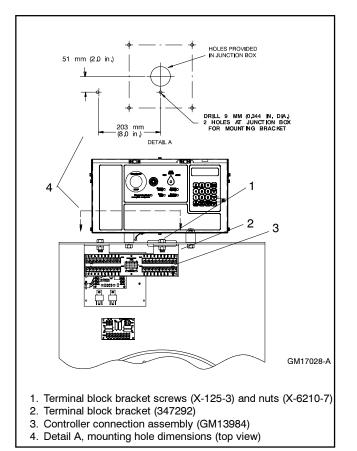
Terminal Block Bracket and Controller Connection Assembly Mounting (350-450 kW)
